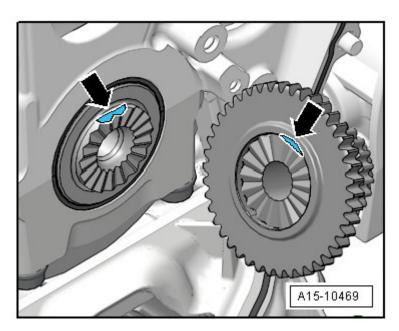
Chain Sprocket Crankshaft, Installation Position
